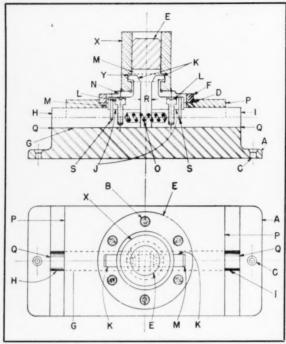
Drawing of gaging fixture for checking the diameter and concentricity of annular grooves
